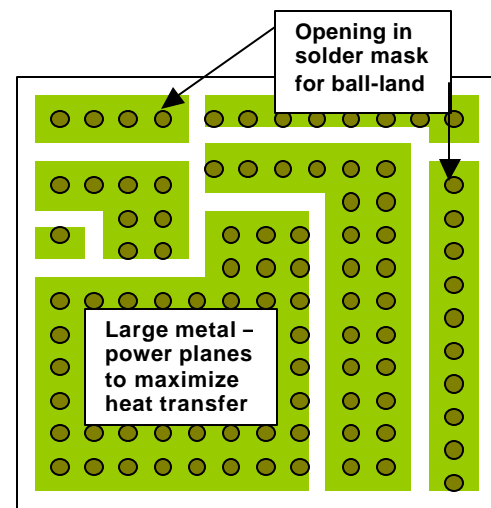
PCB design showing large Cu power planes instead of individual ball lands for better thermal performance
